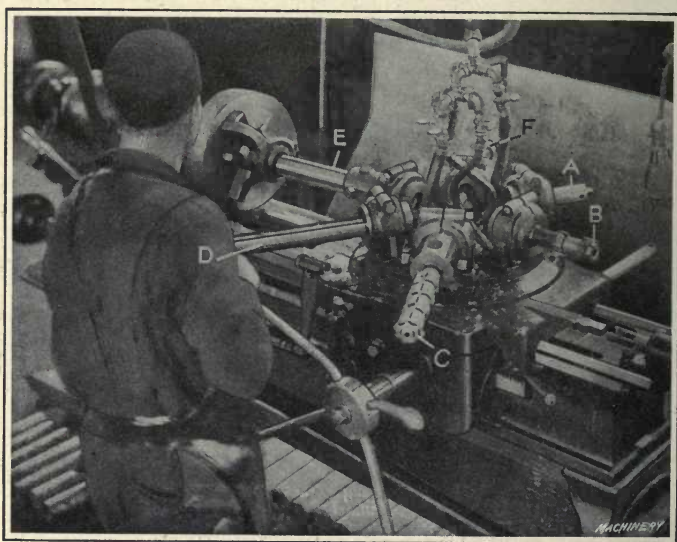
Boring, counterboring and reaming Cavity of Russian High-explosive Shell
